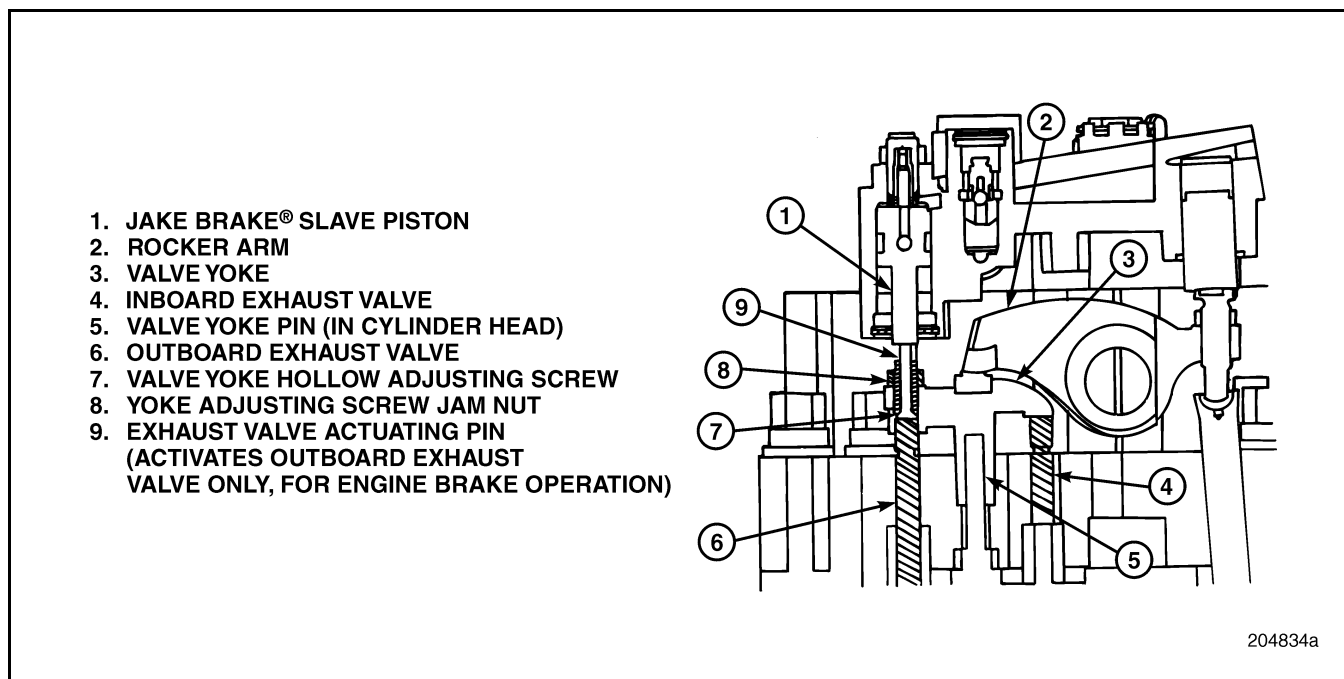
J-Tech™ Brake Valve Yoke Hollow Adjusting Screw Arrangement
